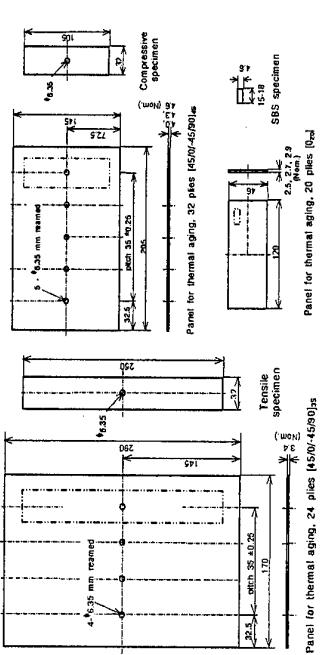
Geometry of panels for isothermal aging and specimens tested; dimensions in mm.
